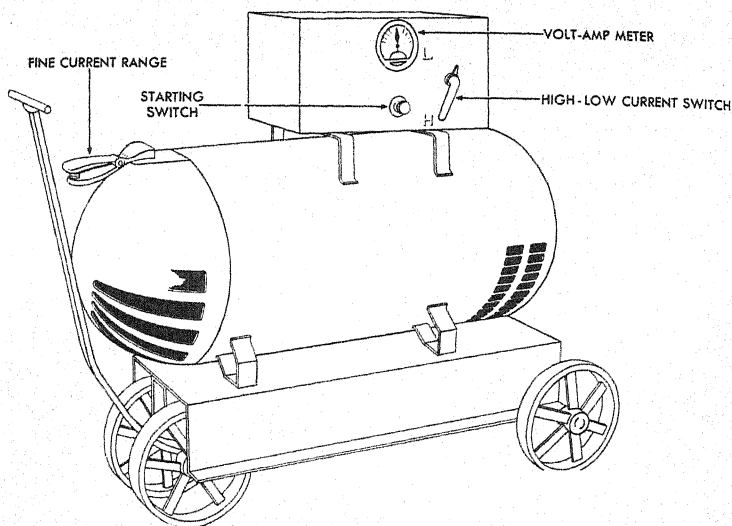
Typical motor generator type alternating-current type welding machine.
